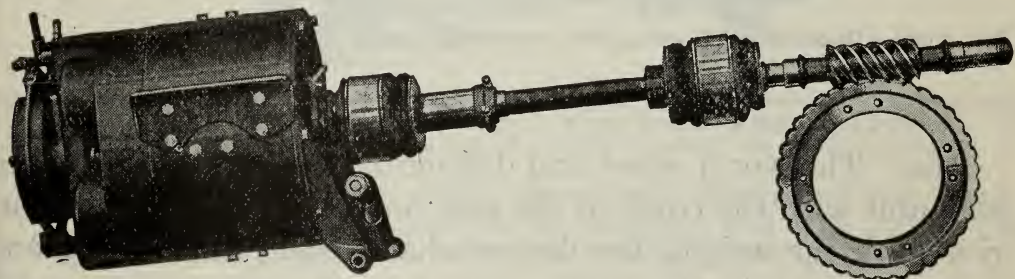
,082.—Baker R and L motor, propeller shaft, universal joints, worm and gear. This is the straight type top mounted worm drive.
